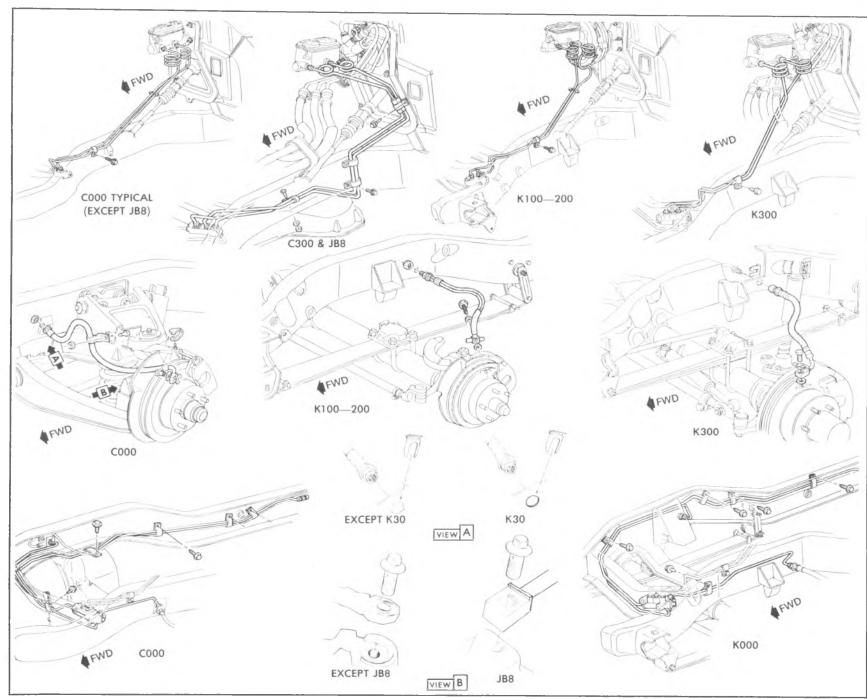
Front Brake Pipes and Hoses--C-K Models
